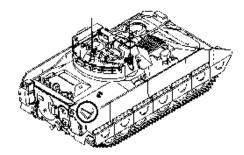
External Fire Extinguisher Handle Wire and Lead Seal (Rear).
